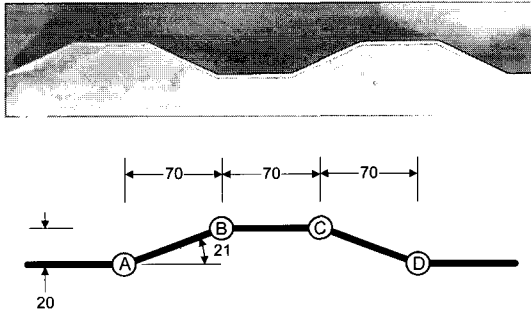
Photograph and schematic of manufactured seam's dimension and unit[mm]
